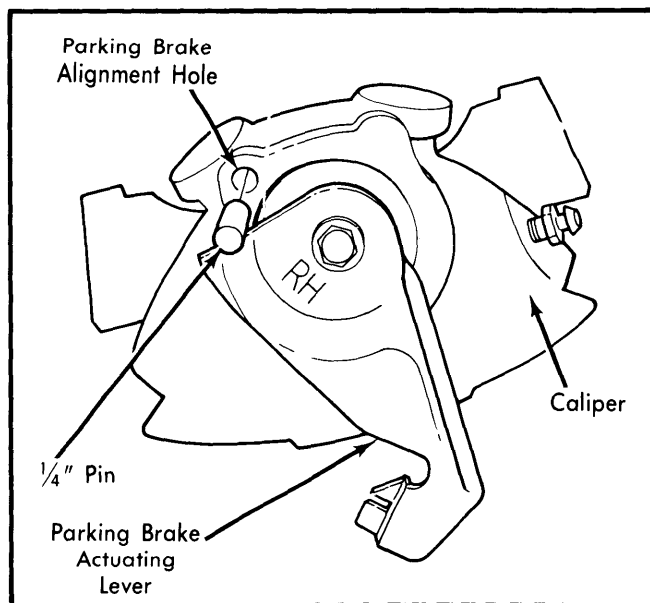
Rear Disc Brake Parking Brake Adjustment (Versailles Models Only)
